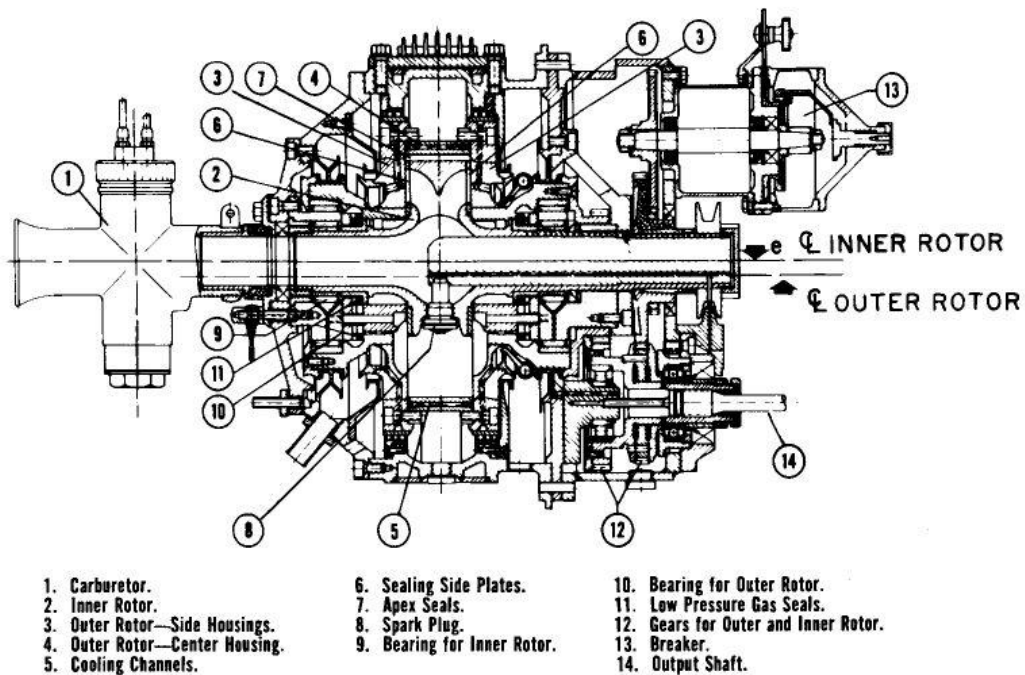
Section view of DKM 125 Wankel combustion engine [67]
